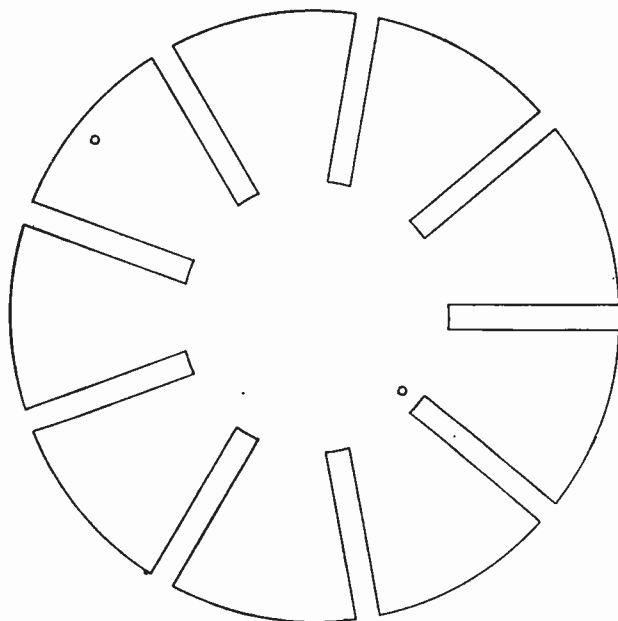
The card on which the wire is wound. It is drawn exact full size.
